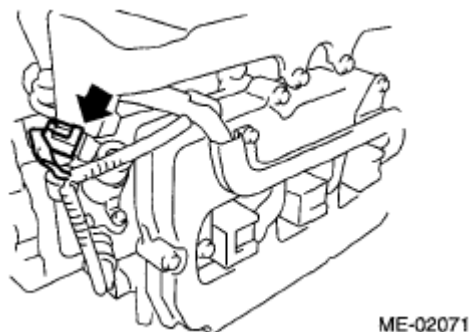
Disconnecting Connector From Oil Switching Solenoid Valve
